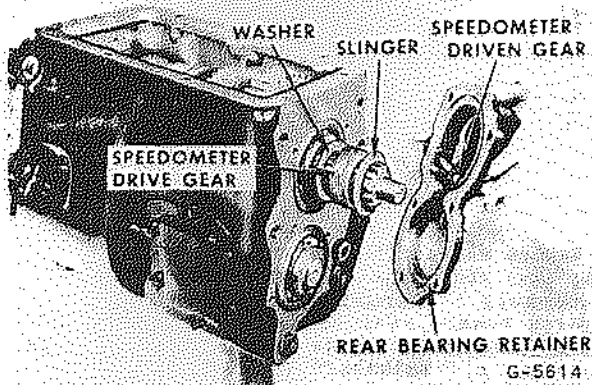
Removing Mainshaft Rear Bearing Retainer
